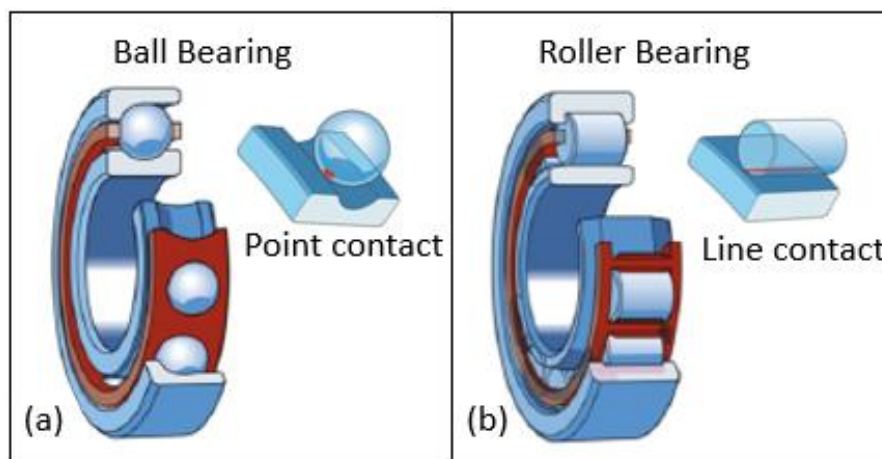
Two most common REBs. (a) Angular contact ball bearing. (b) Cylindrical roller bearing (source: SKF).
